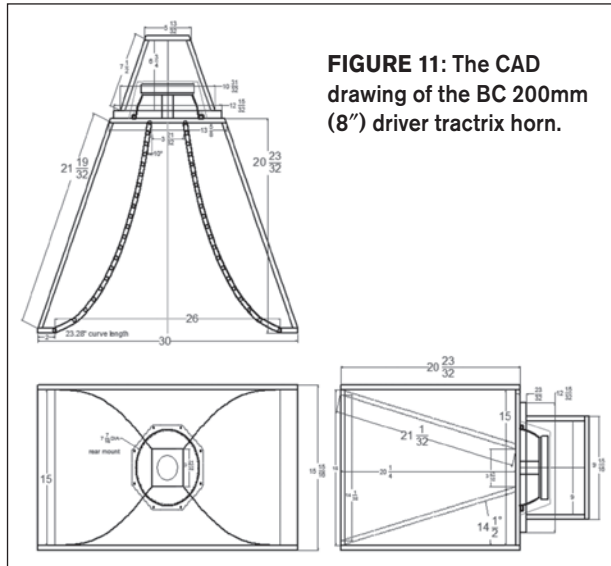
The CAD drawing of the BC 200mm (8") driver tractrix horn.
